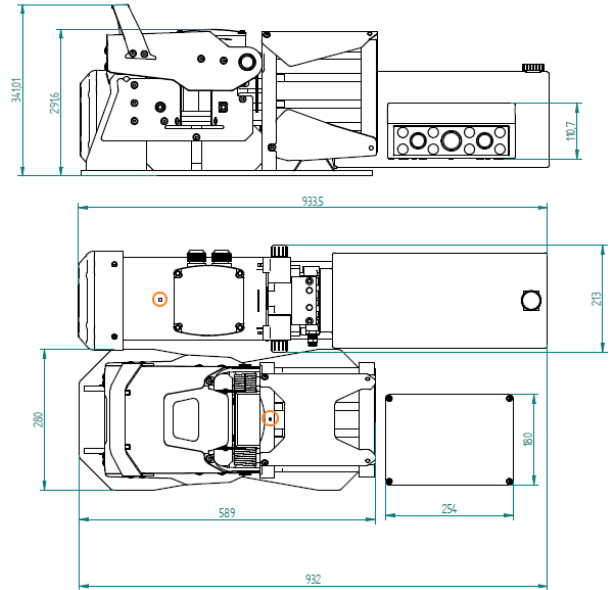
Dimensions of the stationary chain cutter, incl. attachment points marked in orange
